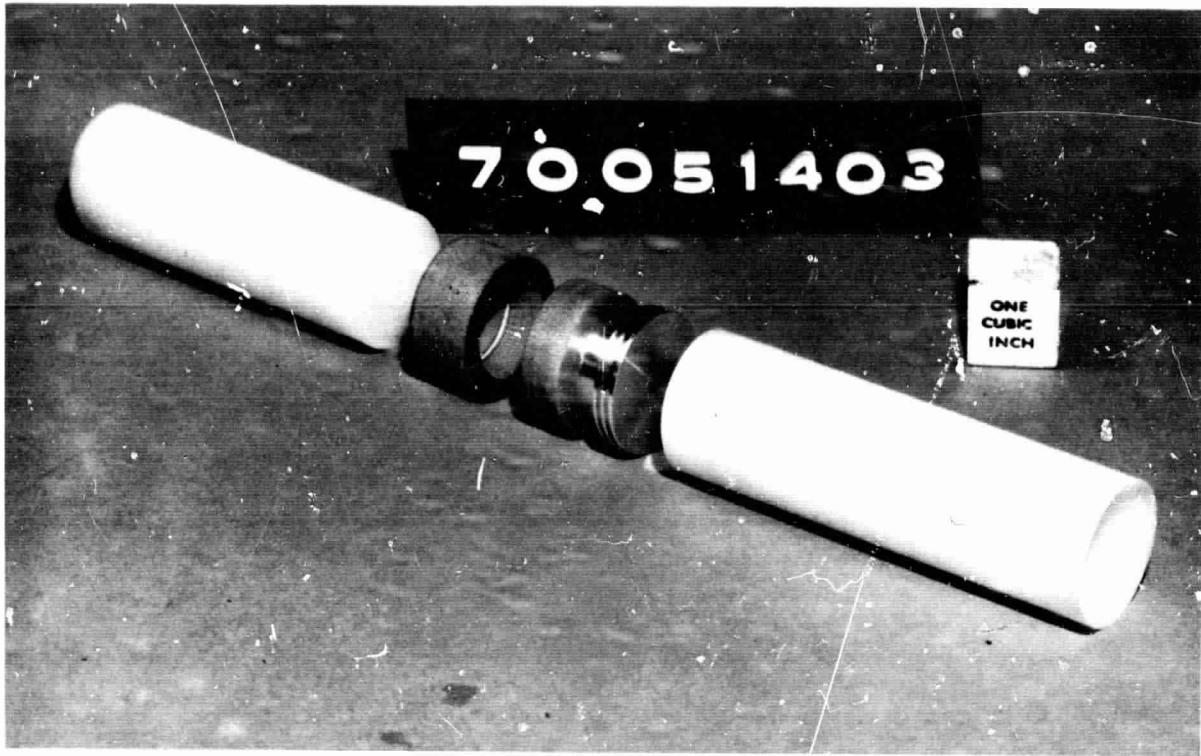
Glass-Reinforced Epoxy Collapsing-Mechanism
